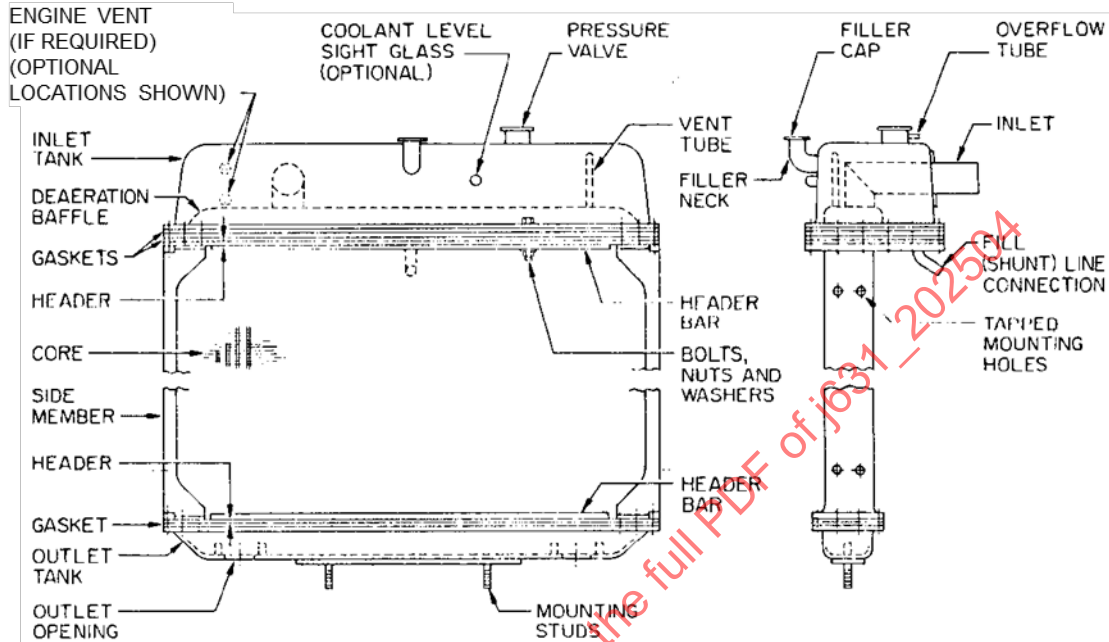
Bolted-type radiator, drawn tanks (typical deaeration system shown)
